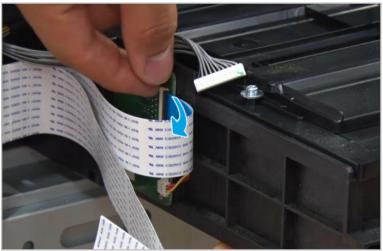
Disconnect the laser scanner assembly harness and FFC
